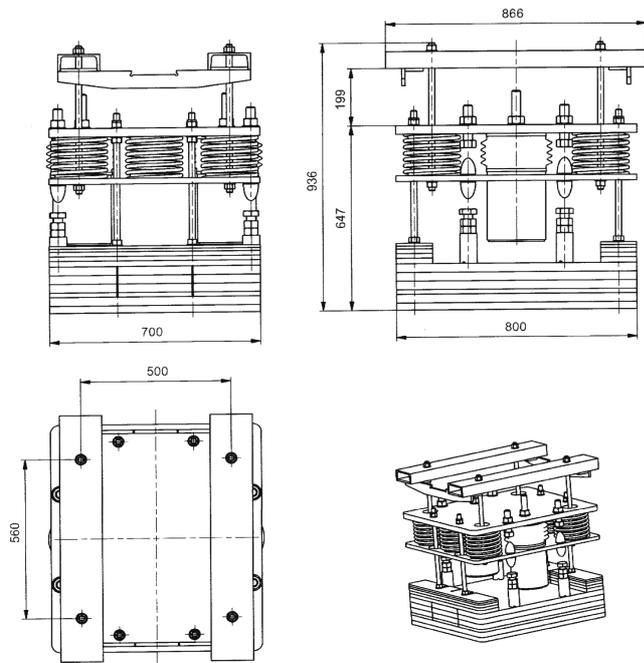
The design of dampers mounted in the $1/4$ and $3/4$ of the bridge span.
